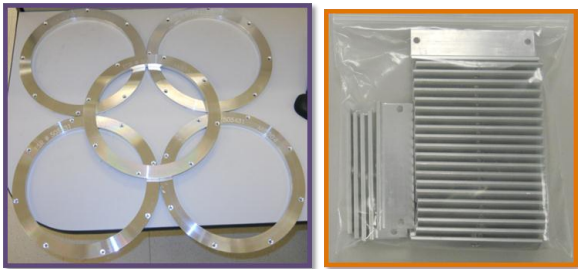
Example of parts machined in Skyworks Mexicali machine shop.
